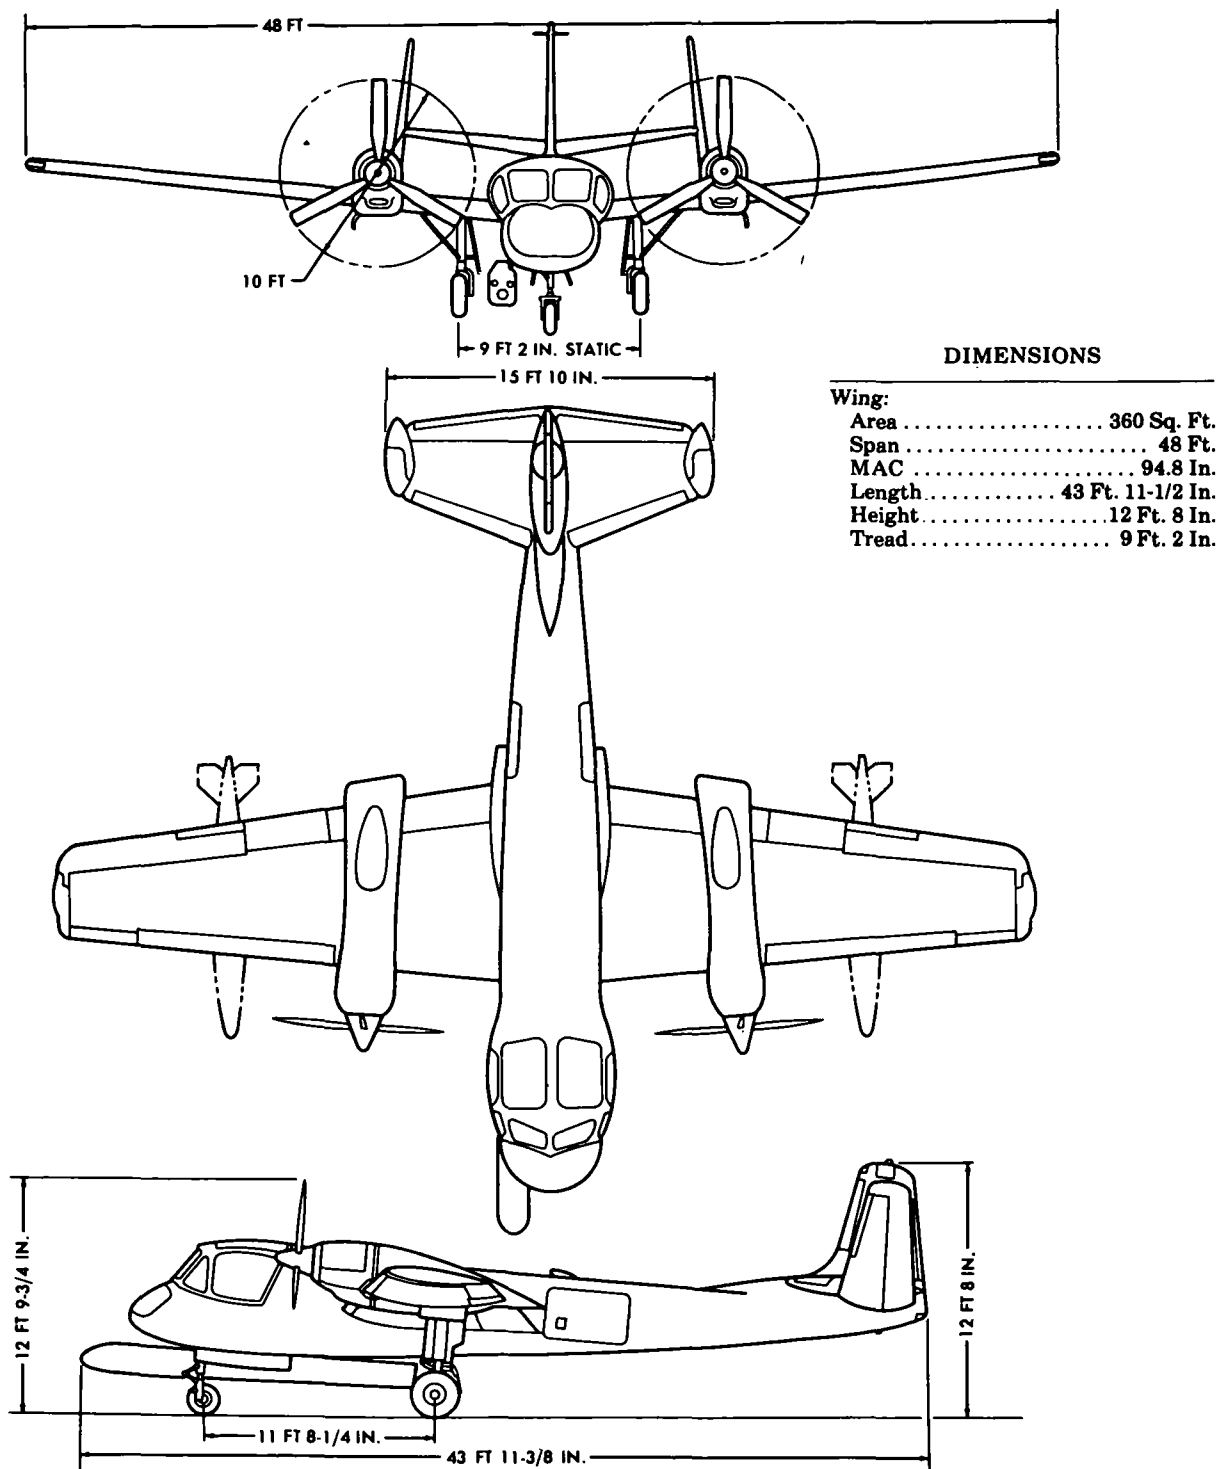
Principal Dimensions, OV-1B (Mohawk)
